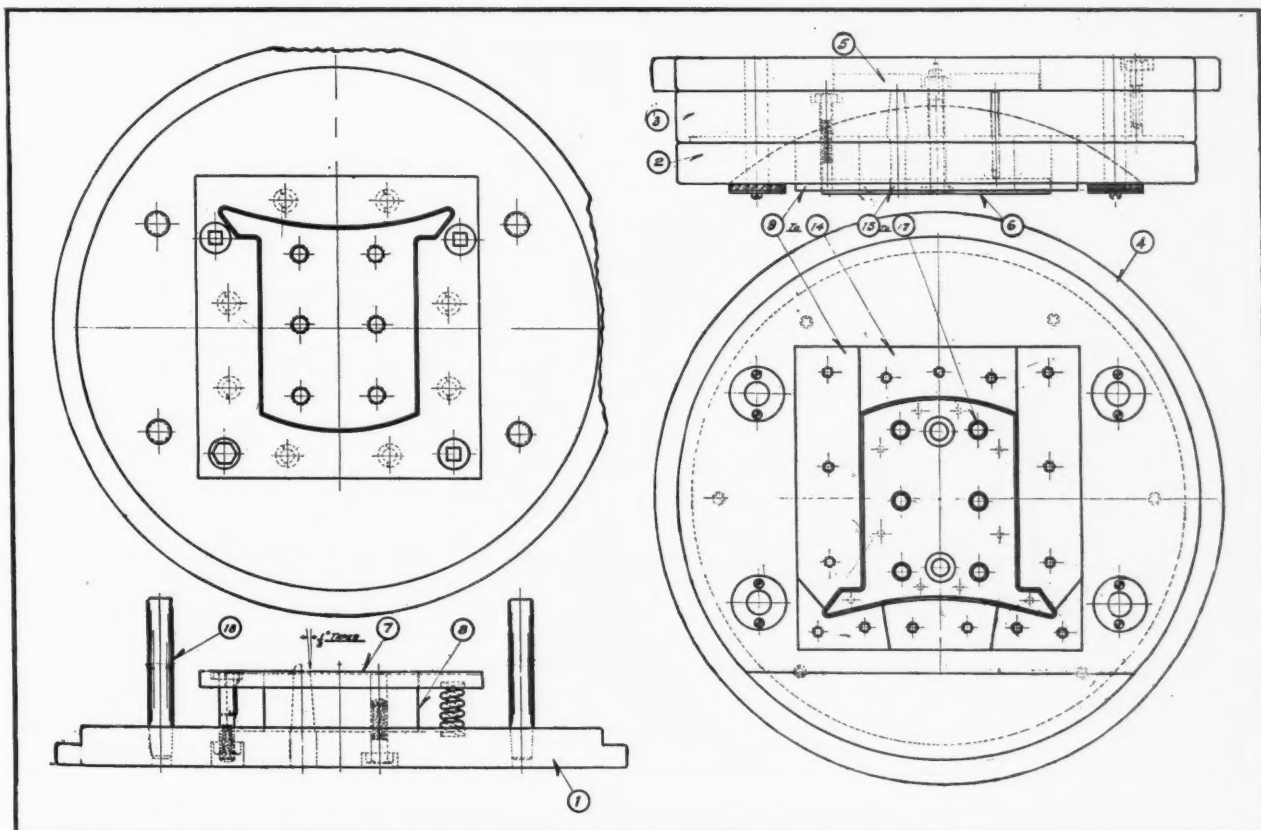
Compound Die of the Style Used for Producing Pole Laminations
